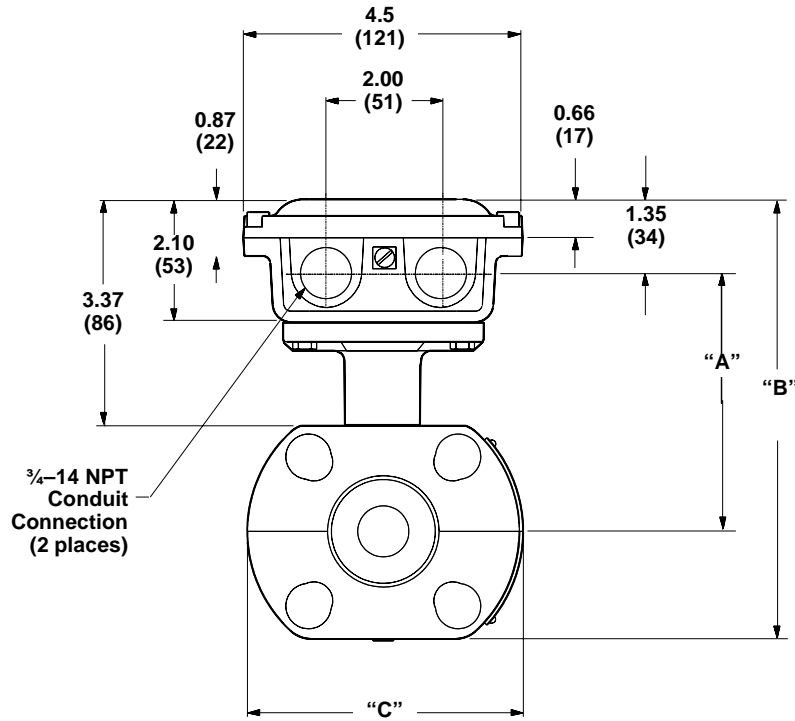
Model 8711 Dimensional Drawings (1.5-inch through 8-inch line sizes).
